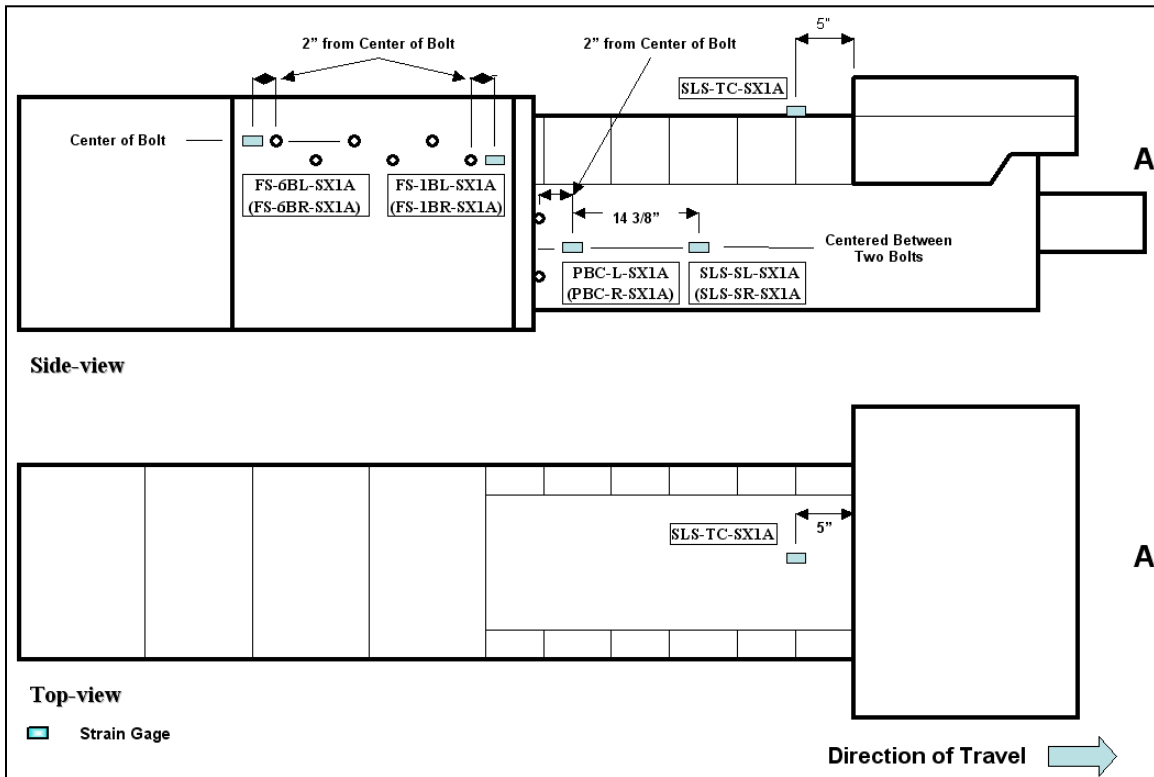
Strain Gauge Layout on Car 248 (Leading) End Fixed/Sliding Sill
